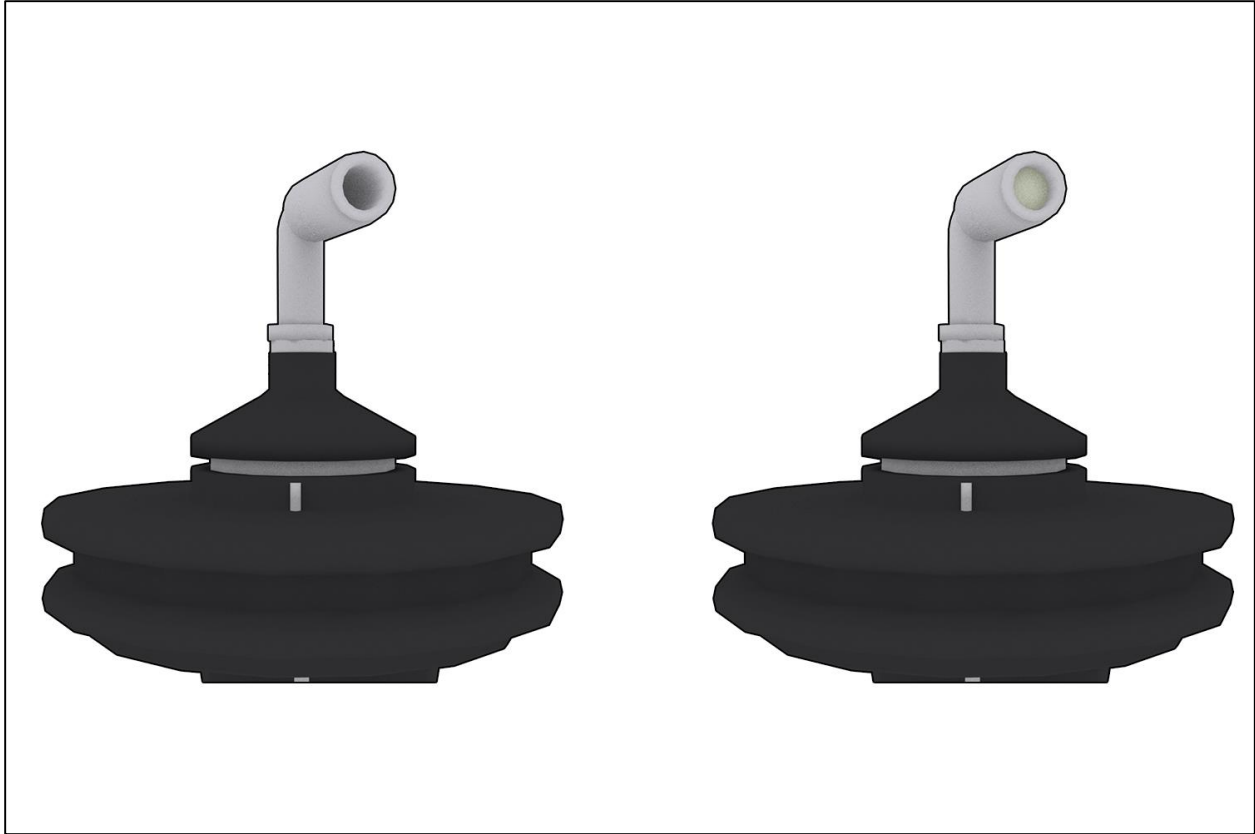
A wrong size breathing bag spring shown on the right. The nonflawed spring is shown on the left.
